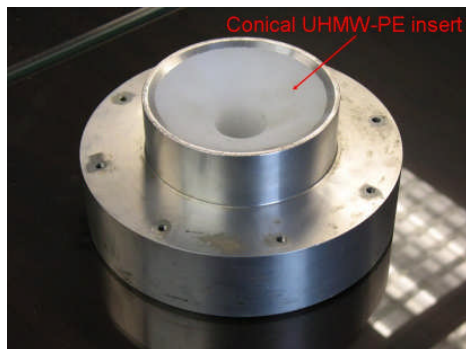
Bottom of the CDSE, showing the conical UHMW-PE insert used to guide the drill steel into place when attaching it to the chuck.
